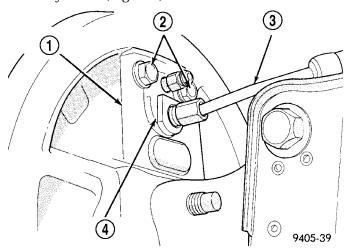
Brake Hose And Wheel Cylinder Mounting
